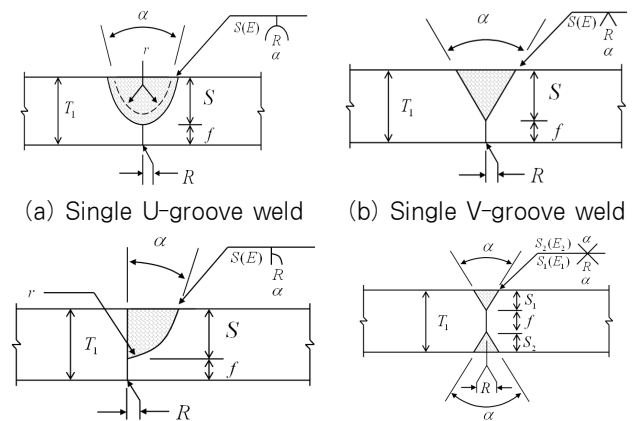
Examples of AWS-prequalified PJP weld details
